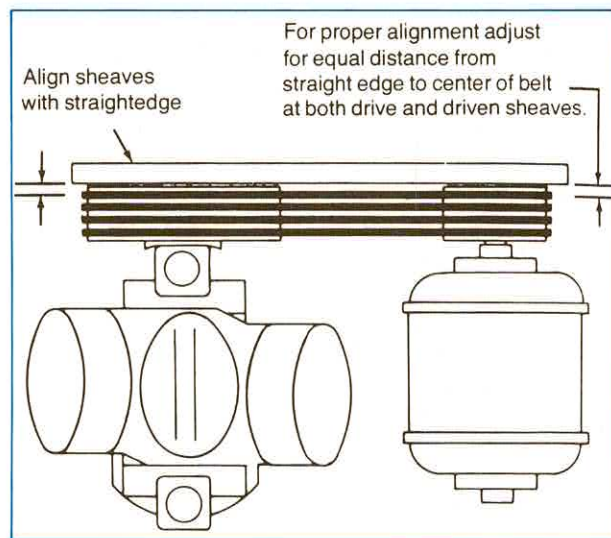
CORRECT V-BELT DRIVE ALIGNMENT
